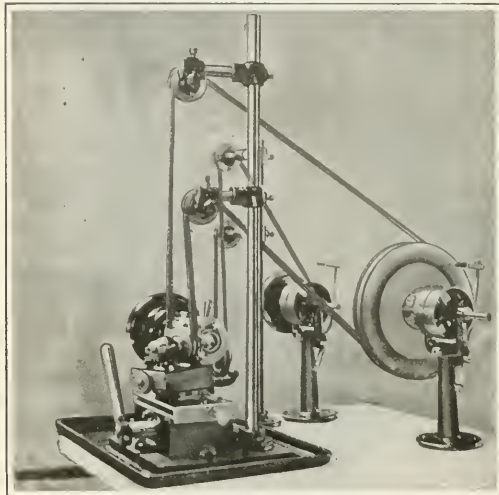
View of Machine showing Work in Chuck and Roughing Cutter
